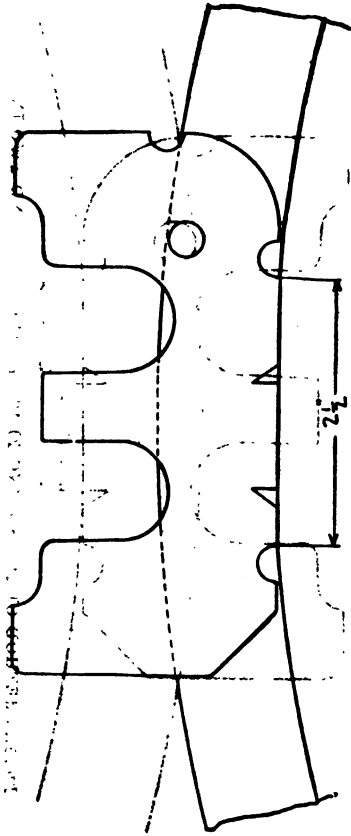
METHOD OF GAUGING SHELLS AND FLAT SPOTS.
